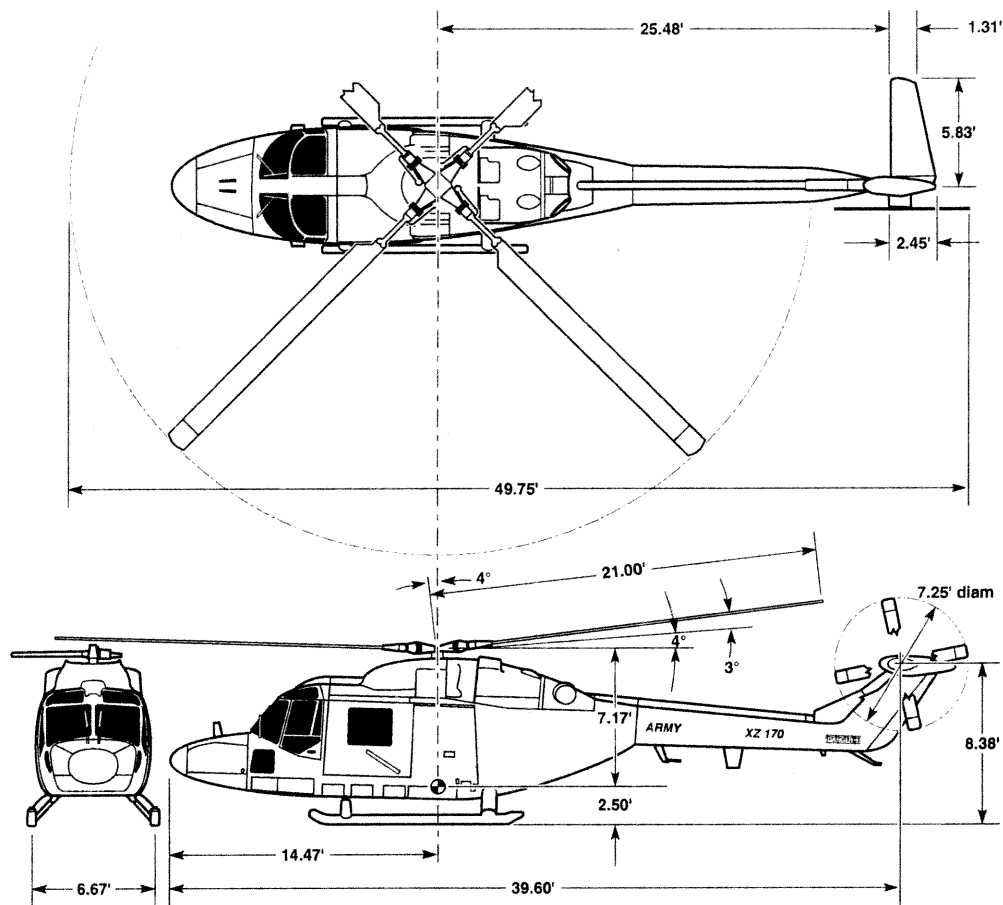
Three-view drawing of the Lynx-XZ170 helicopter.
